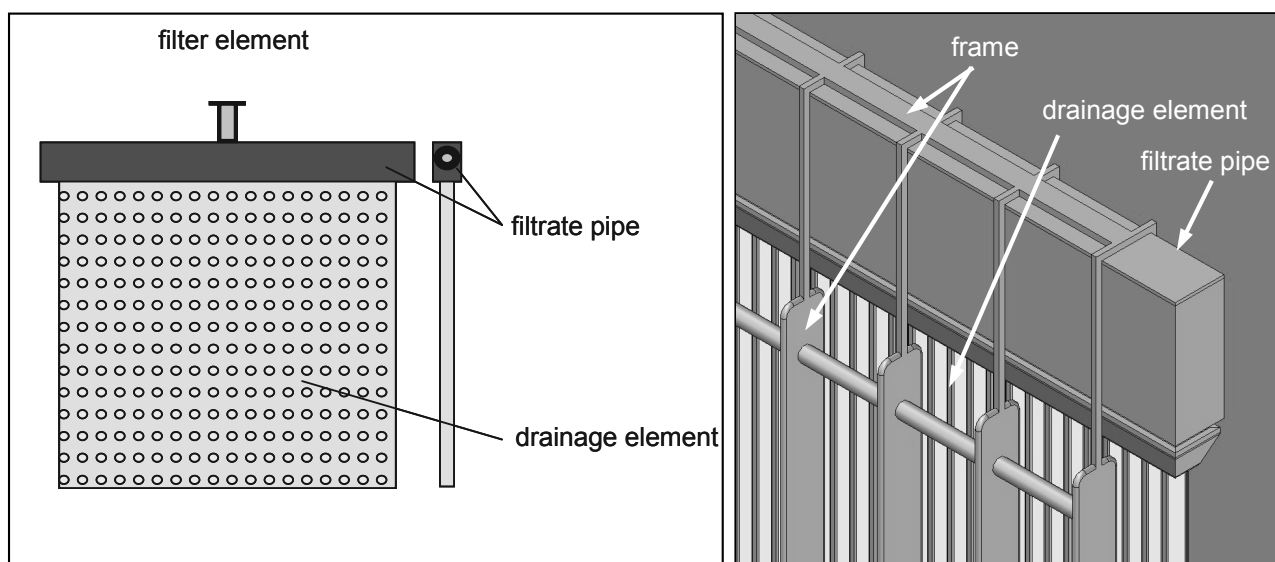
Schematic view the new filter element design (left) and frame design (right)
